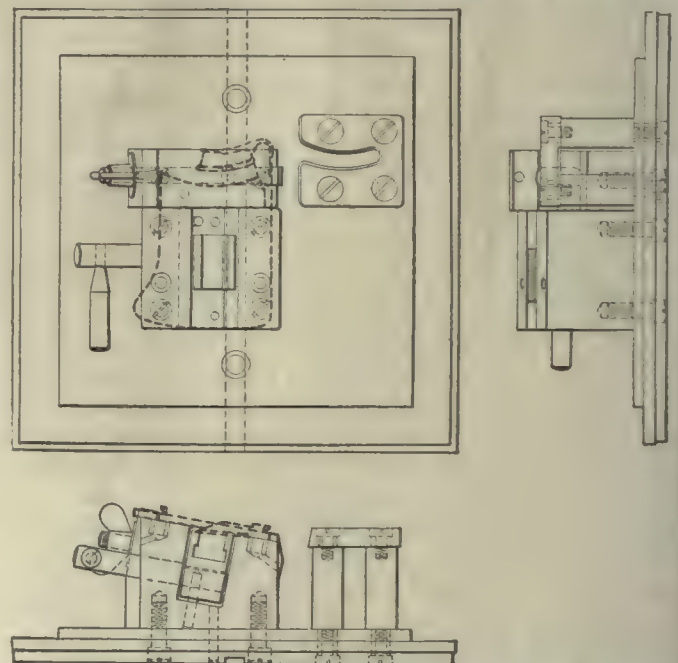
PROFILING FIXTURE FOR CLEARANCE SLOT
